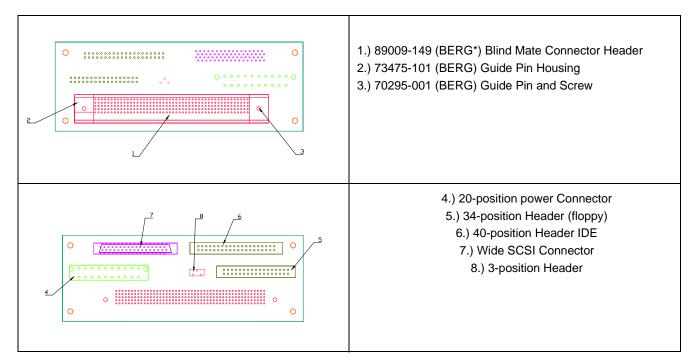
Peripheral Bay Board (Chassis Side) Layout
